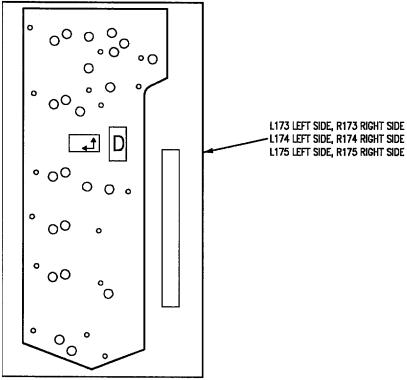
Drilling Holes in Skins or Substructure (Sheet 9)
